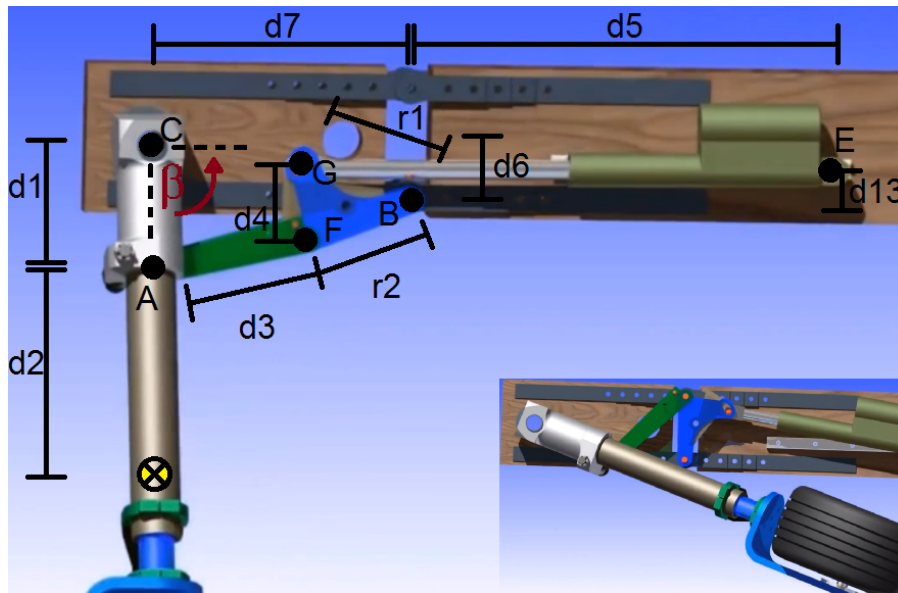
Visualisation of the landing gear in deployed and partly retracted position.
